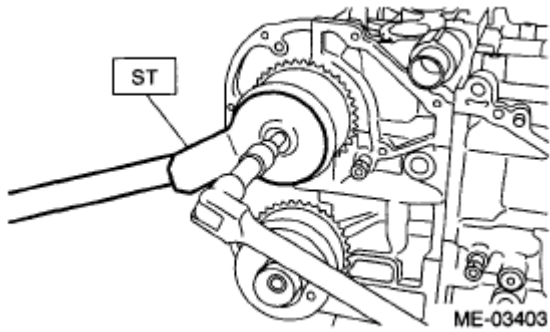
Identifying Cam Sprocket Wrench (Intake Side)
